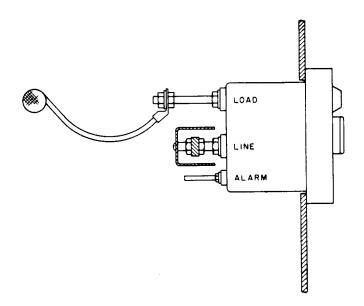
Fuse Blocks — KS-14170 and Similar Types — Wires Larger than No. 14 Gauge
